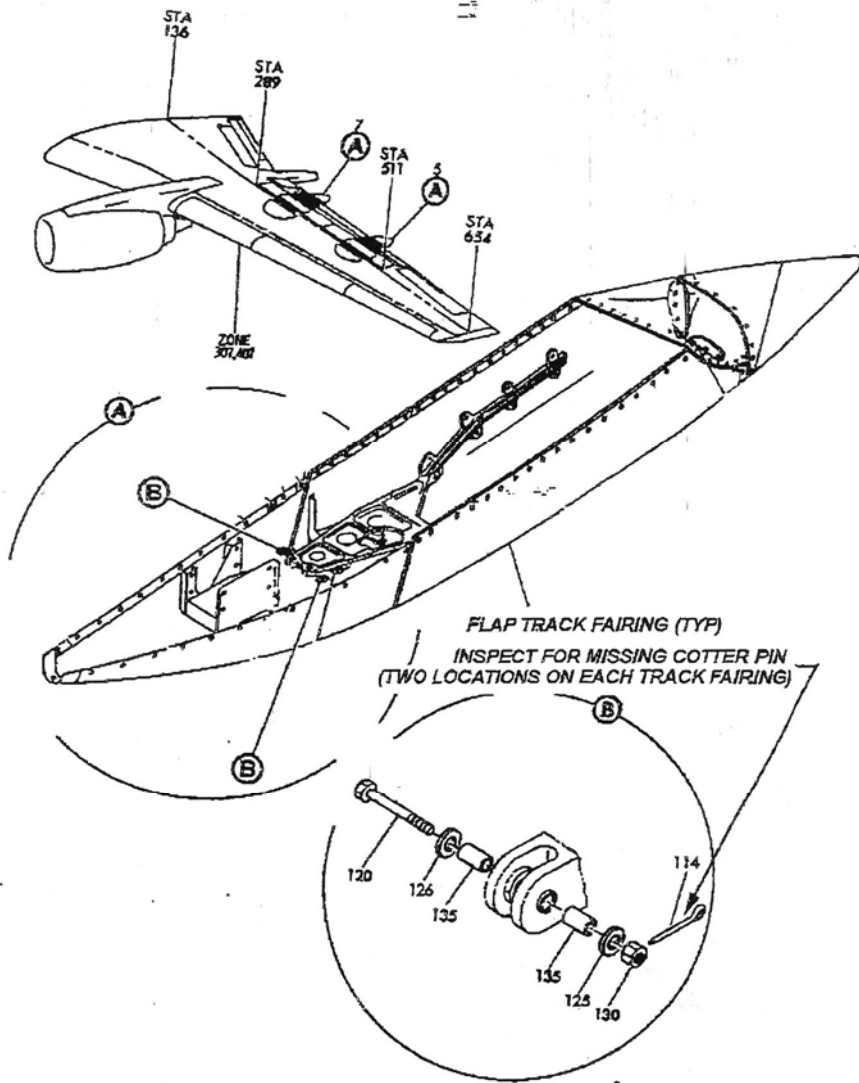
WING TRAILING EDGE OUTBOARD FLAP TRACK FAIRINGS - INSPECTION
